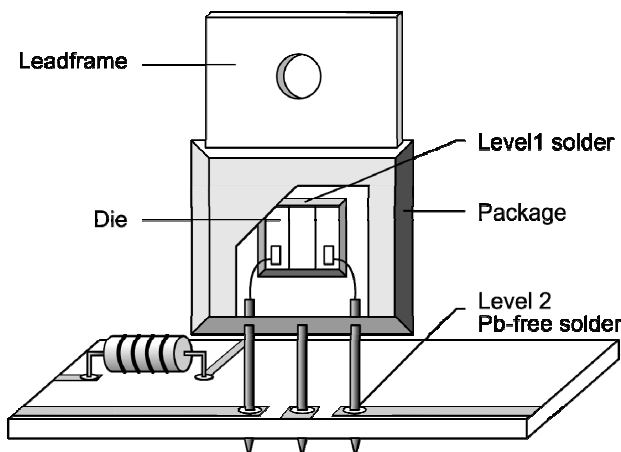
Different usage of high- and low-melting solder in hole-mounted integrated circuit
